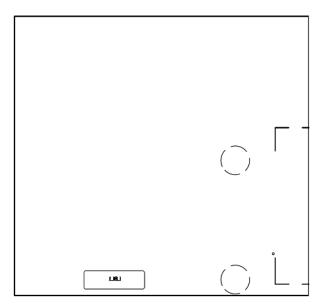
ADS8332EVMV2 PCB Layer 4: Bottom Layer
